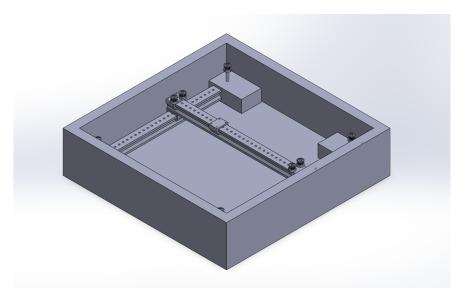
Isometric view of the sand table design, displaying the frame and carriage system.
